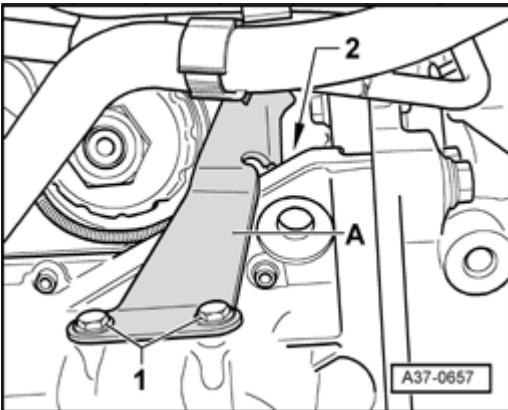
Removing Bolts And Secondary Air Injection Pump With Bracket
